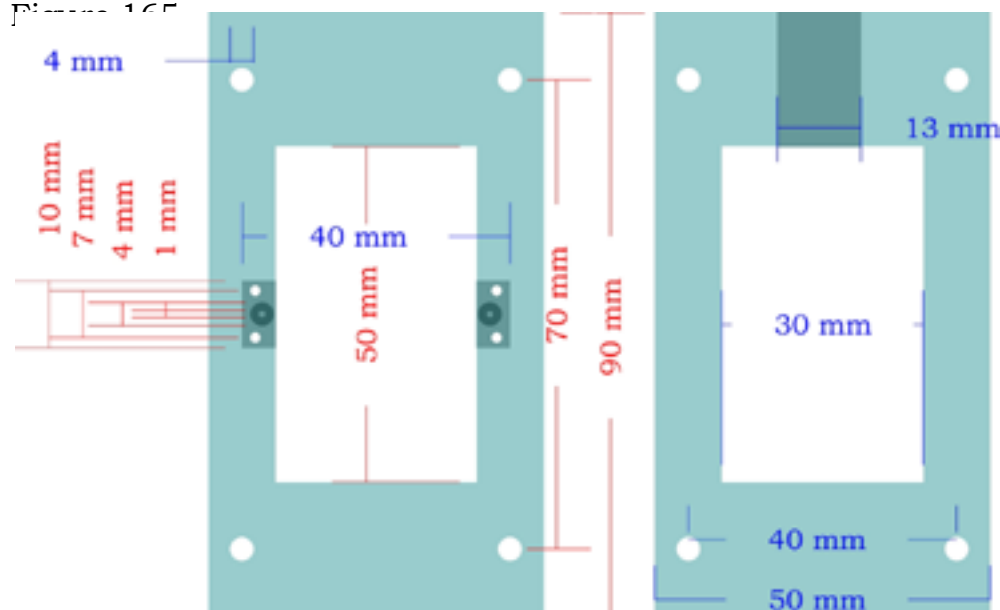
Pipette-shape access aperture and clamping and alignment holes for reagent deliver devices (a) and Ø4 mm tube connection access holes for washing devices (b).
